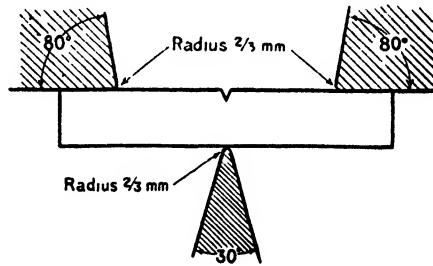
METHOD OF MAKING IMPACT TEST ON BEAM OR CHARPY TYPE SPECIMEN (PLAN VIEW)
